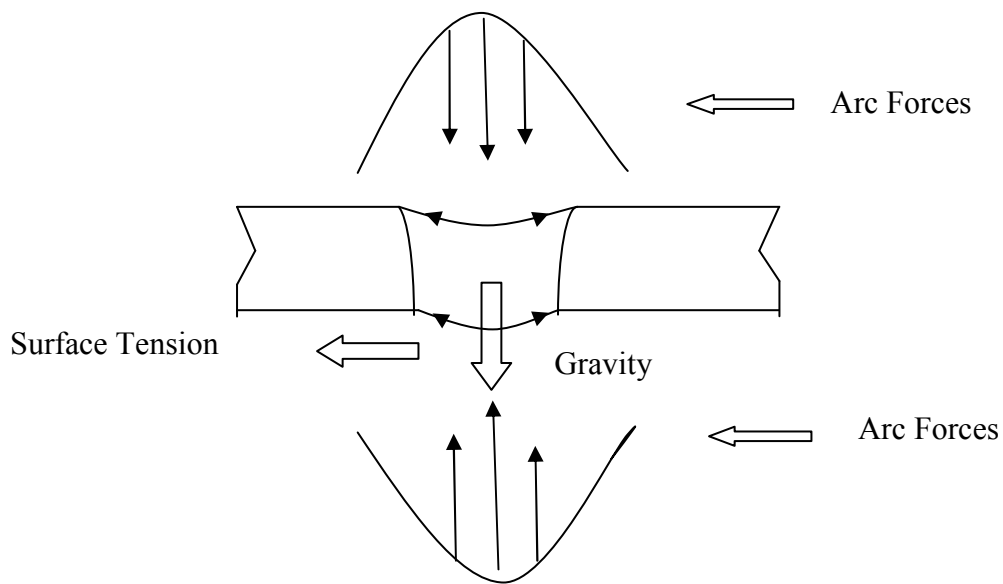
Schematic illustration of the forces acting on the weld pool in DSAW (taken from Anousheh [32]).
